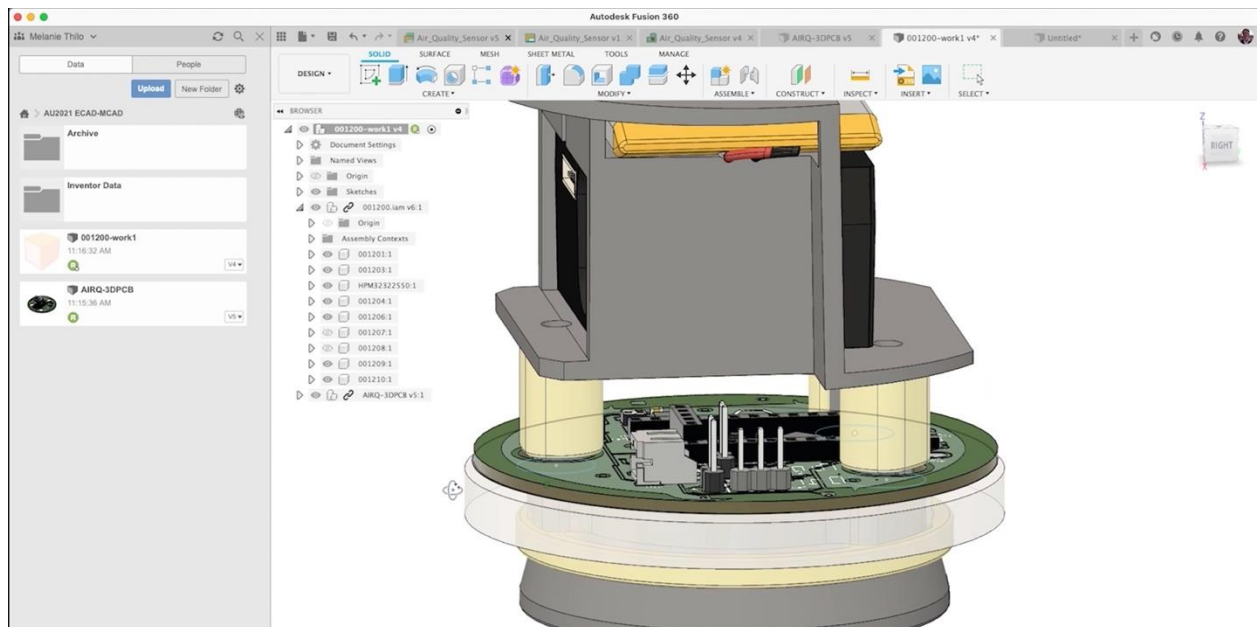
THE FULL ASSEMBLY IN FUSION
